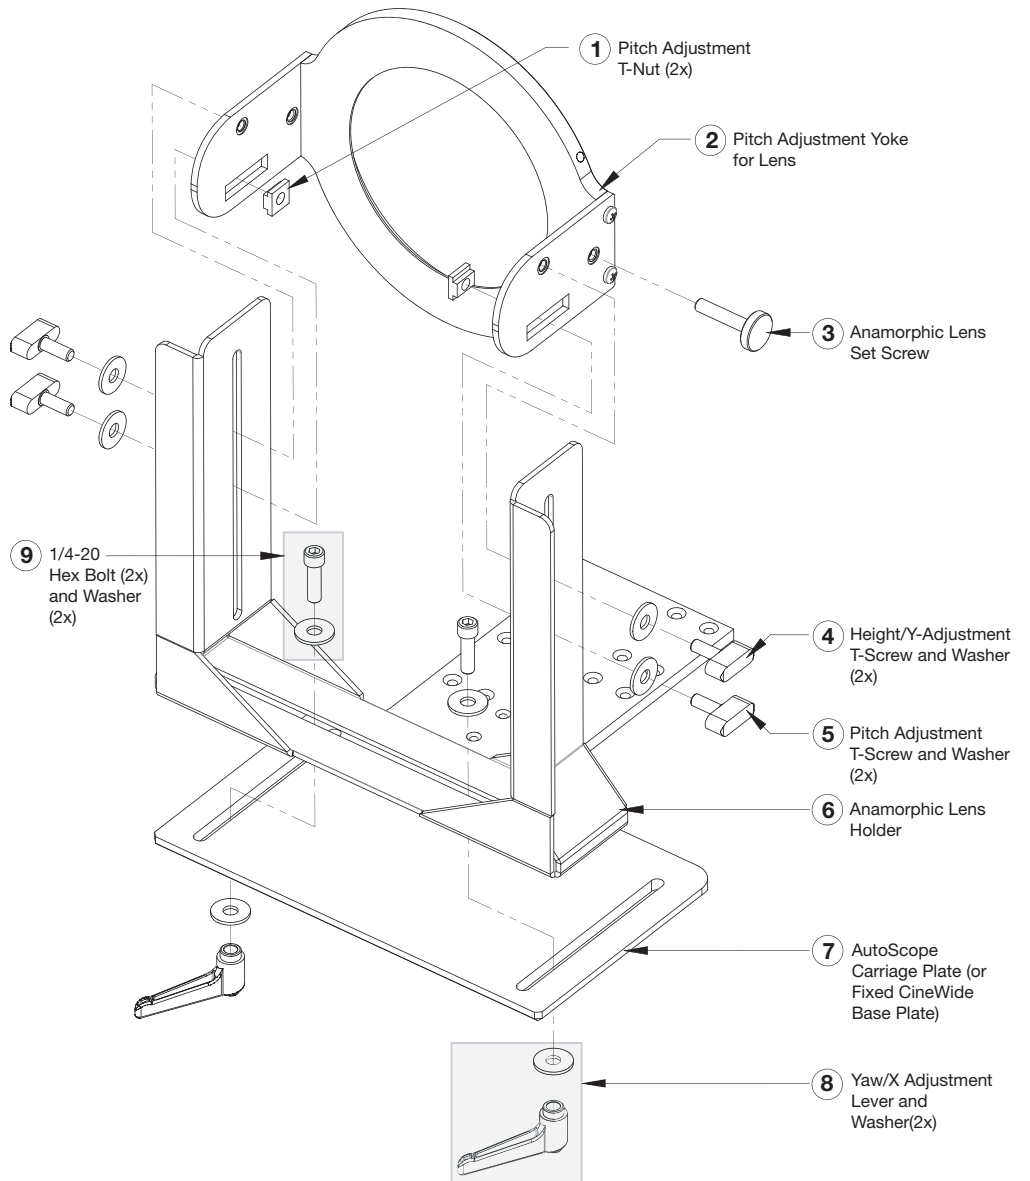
Cylindrical Anamorphic Lens Mounting Assembly - Exploded View
